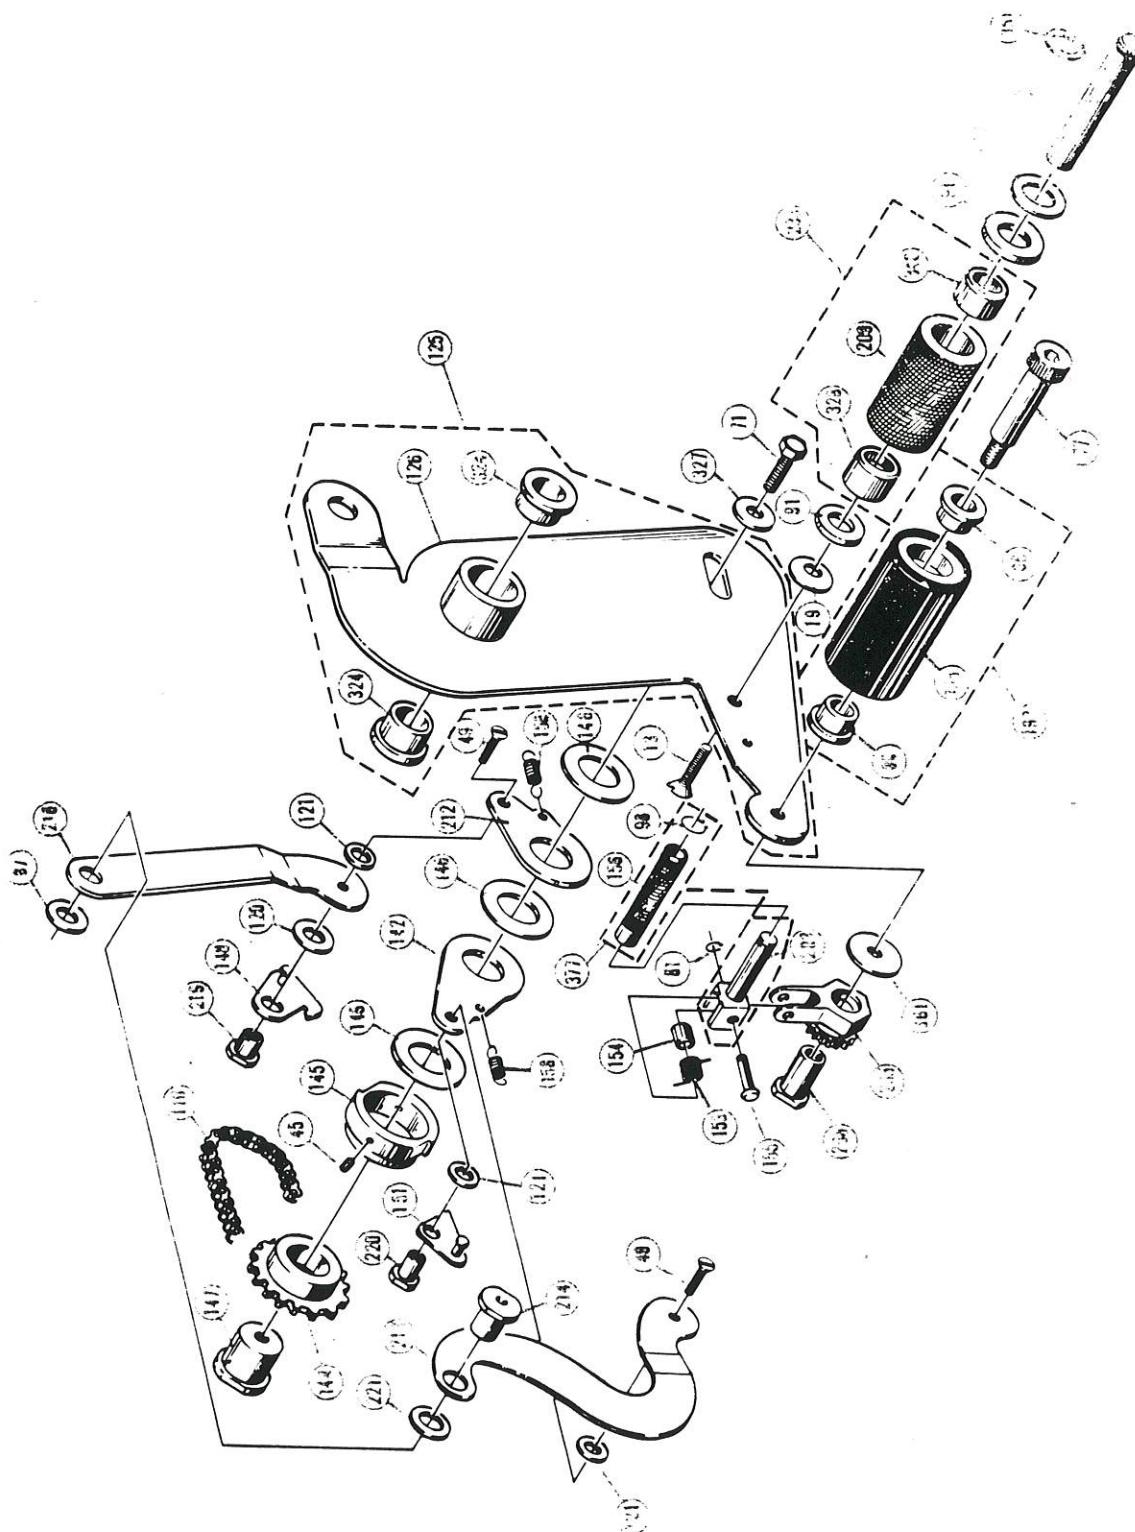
APPLYING ARM ASSEMBLY - UPPER TAPING HEAD
